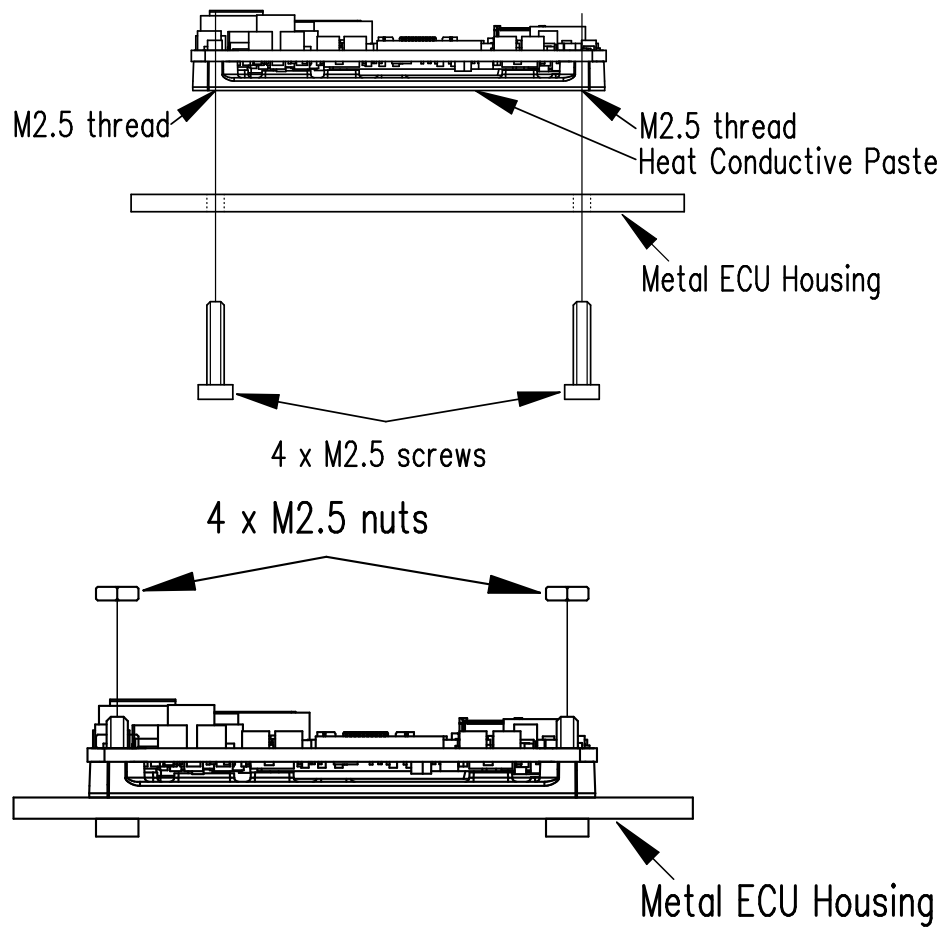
Attaching the FETK-T4.0B to the ECU
